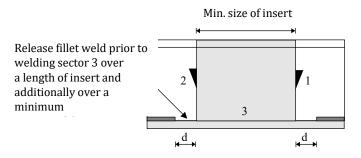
Welding sequence for inserts of stiffeners
